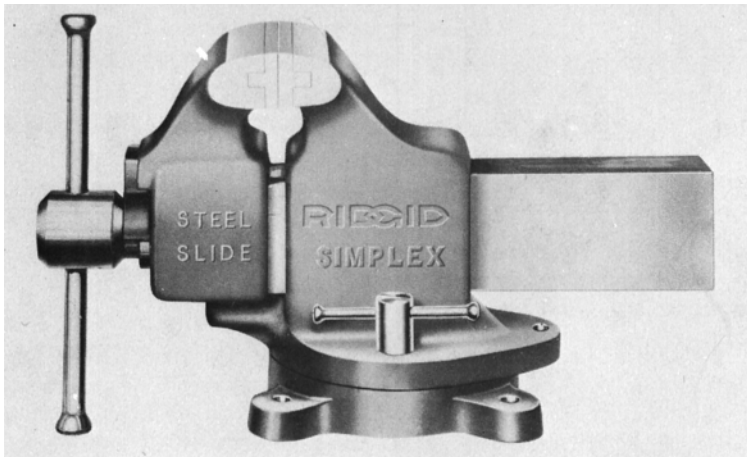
Machinist's vise. (Courtesy Ridge Tool Company.)
